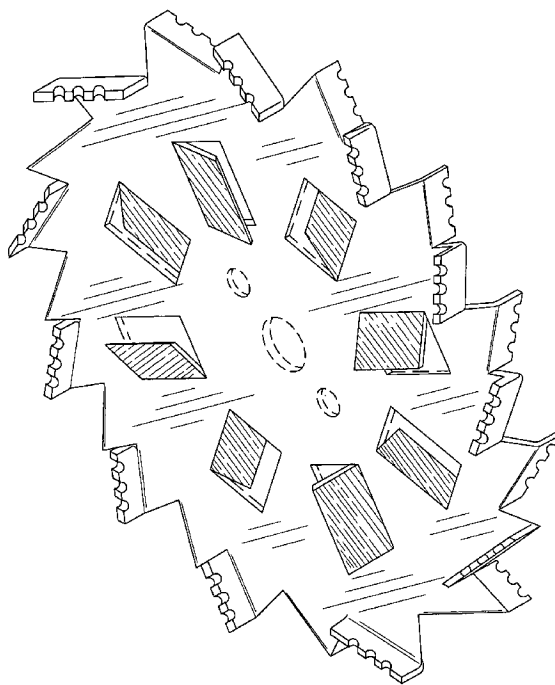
is a top plan view of a turbo pump dispersion blade showing my new design; and,
